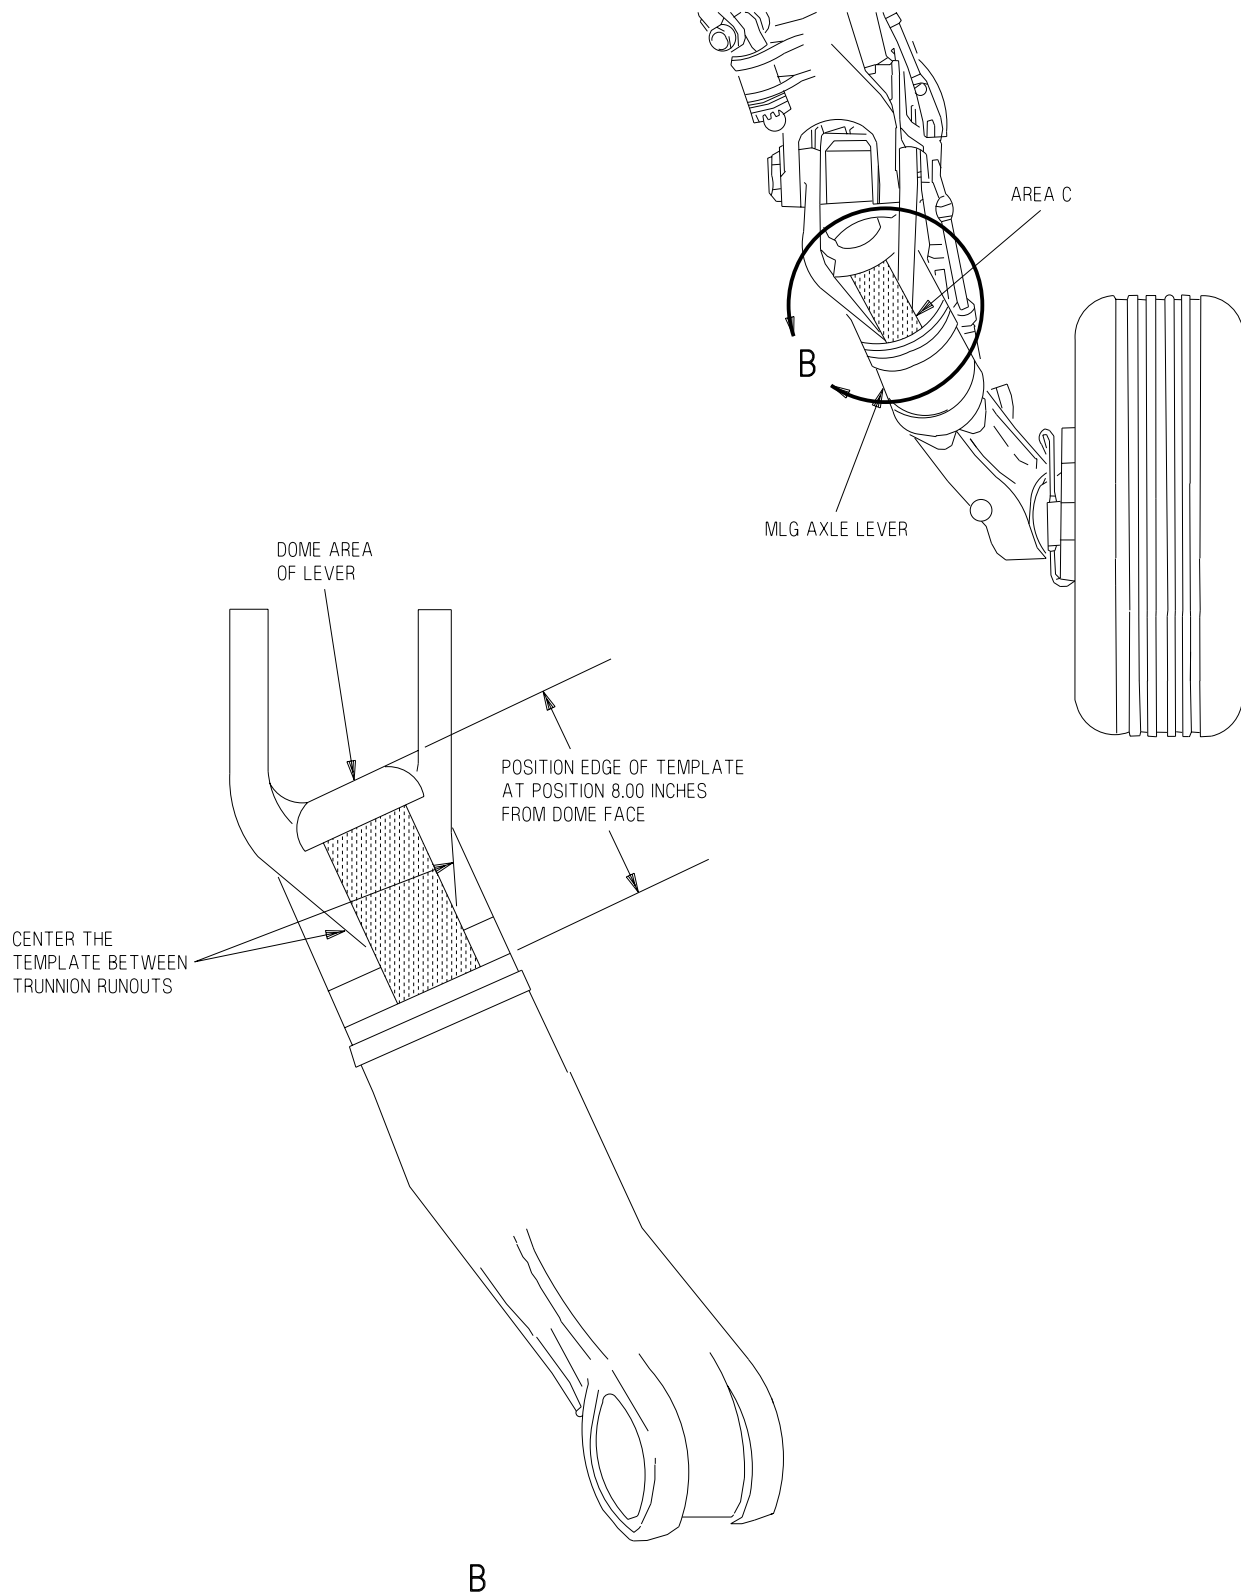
Main Landing Gear Lever Assembly Templates (Sheet 2)
